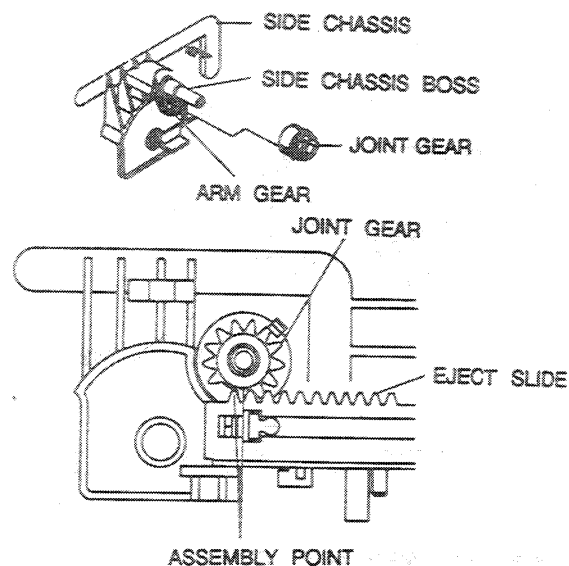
Joint Gear, Arm Gear and Eject Slide Assembly
